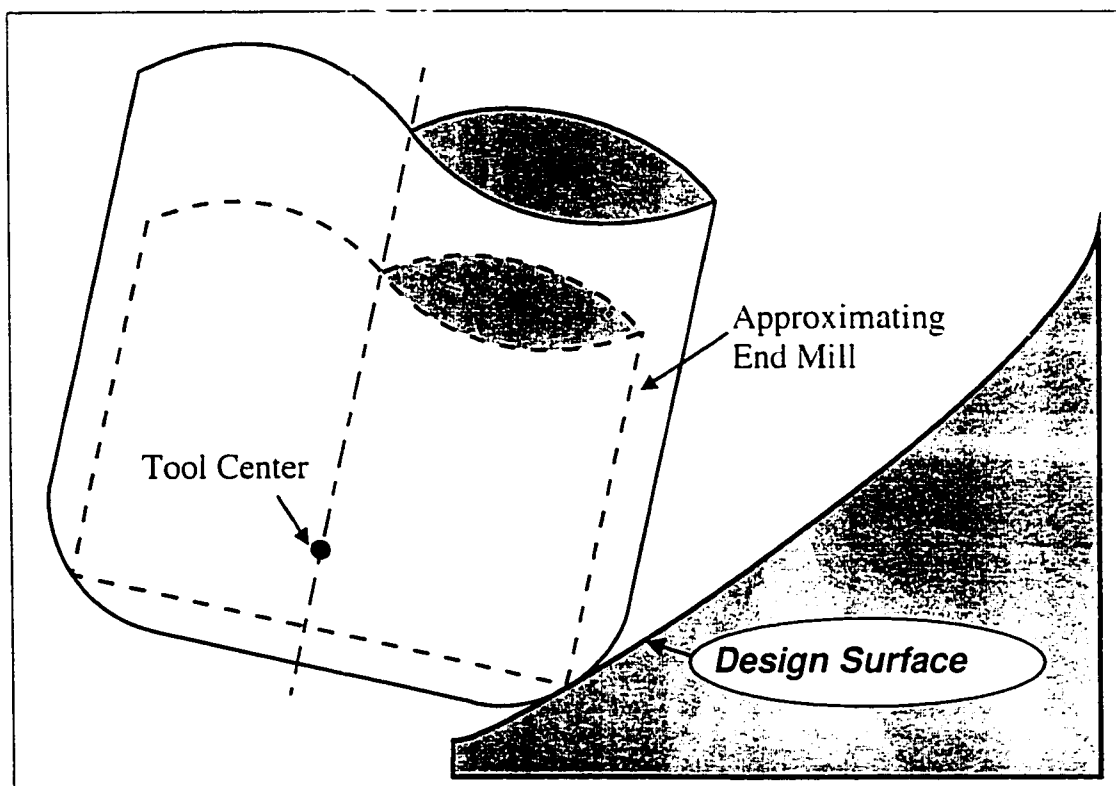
The Flat End Mill Approximates a Toroidal Cutter as it Machines a Surface
